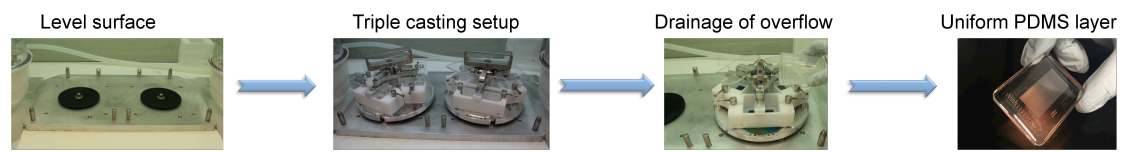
PDMS layer preparation using the height control device (HCD). The HCD structure allows fabrication of uniform casting of 3 chips simultaneously. The mold positioning platform (A) allows accurate mold placement on a flat surface. (B) is the container into which the PDMS is poured. The PDMS casting enables preparation of uniform chips of the same size and thickness. The locking system (C) applies pressure on A & B to prevent PDMS leakage and regulates the thickness of the slab.
